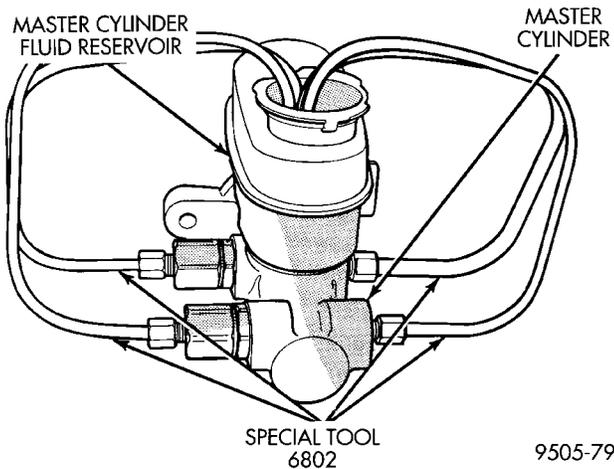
Bleeding Tubes Attached To Non-ABS Master Cylinder
